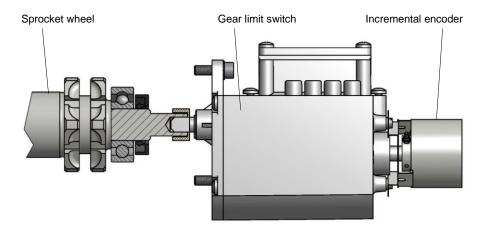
Sprocket wheel with fitted gear limit switch and incremental encoder
